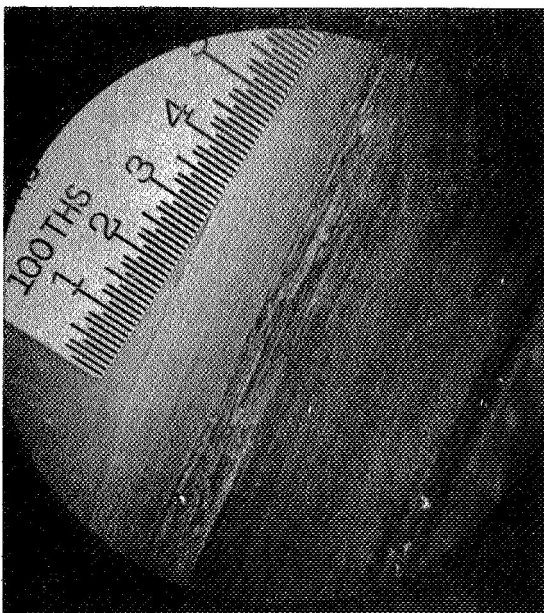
Face Plating Damage - Test Rig Air-Bearing
